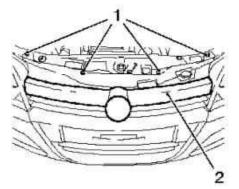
Removing the grille: 1 - grill, 2 - Rivets
